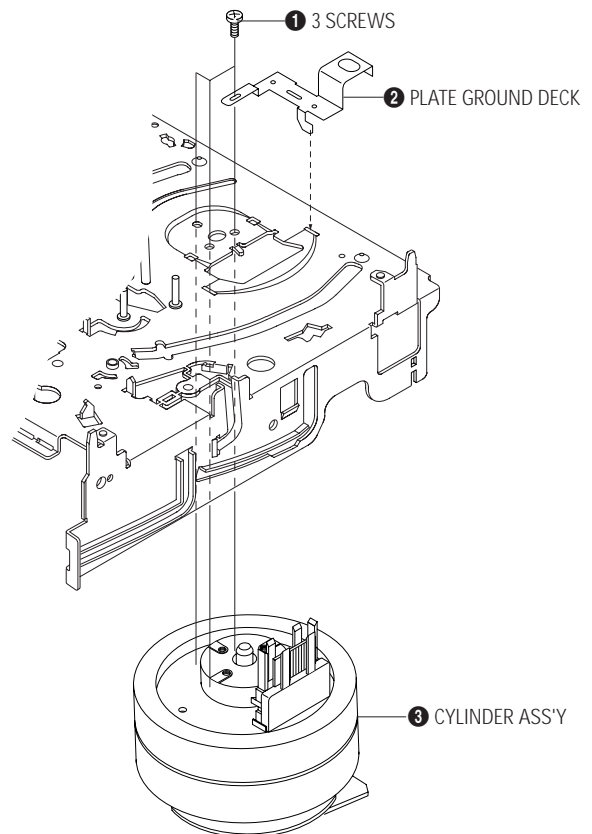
Plate Ground Deck, Cylinder Ass'y Removal
